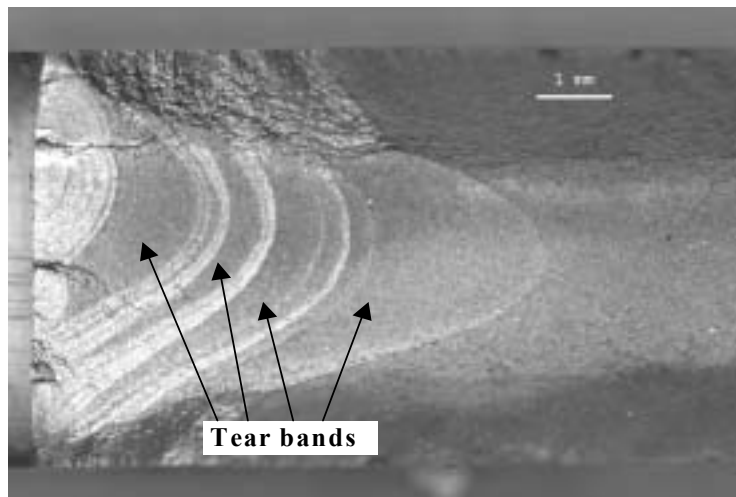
Large tear bands (darker grey areas-indicated by arrows) from a fracture surface of a D6ac steel coupon test, which is a material used in F-111.
